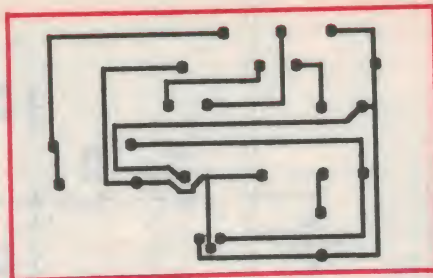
A dot matrix printout of the track side of the PCB for Fig.2, printed using an Epson LQ-800 printer driven from Traxplot.
